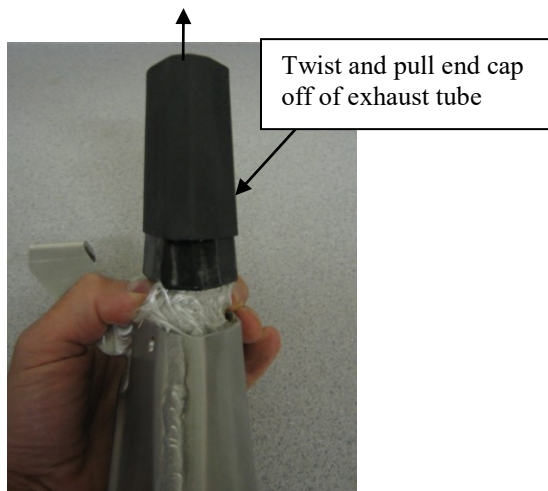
Pinch location to hold exhaust tube while pulling off end cap.
